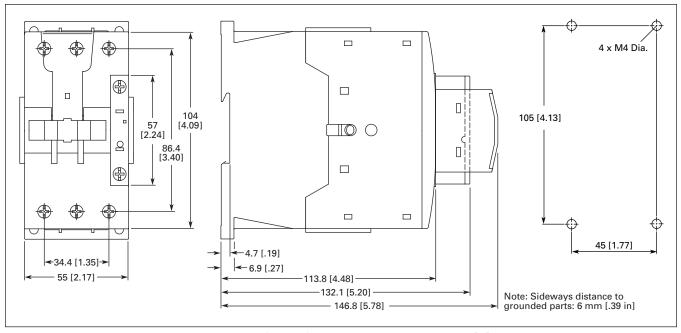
Frame D, XTCE040D – XTCE072D Contactors (40 – 75A) — Approximate Dimensions in mm [in]
